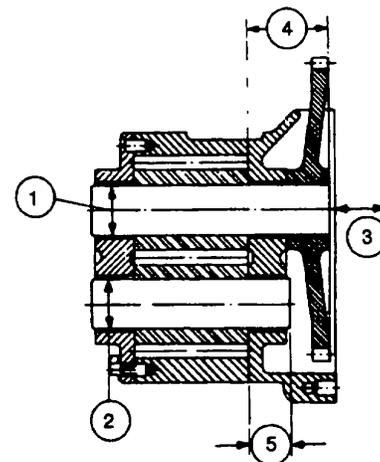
Lubricating Oil Pump Fits and Clearances
